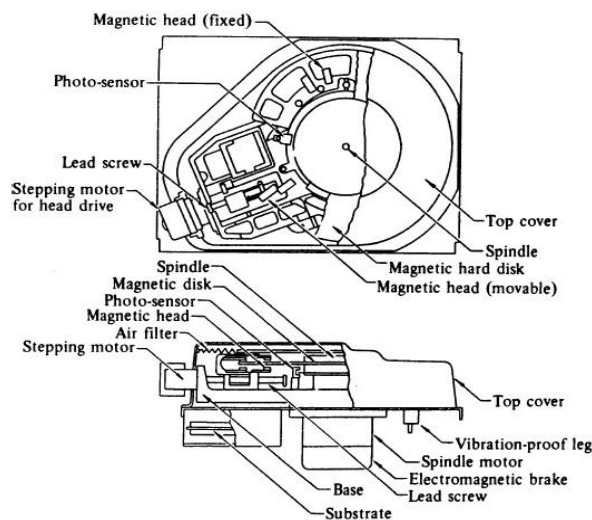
An Example of Hard Disk Drive (Single Disk Type)
